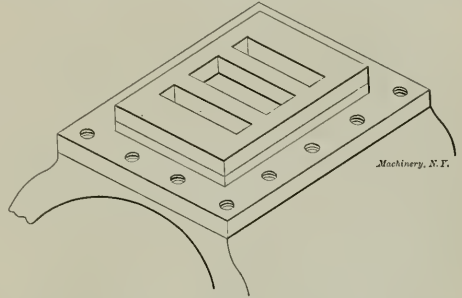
False Valve Seat for Locomotive Slide Valves.
